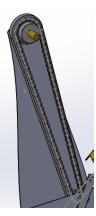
The chain that transmits the windpower collected from the branches to the bottom sprocket. Due to the absence of half-links, the chain couldn't be tightened to the desired length, causing unsteady motion. As a result, it was removed in the final design.
